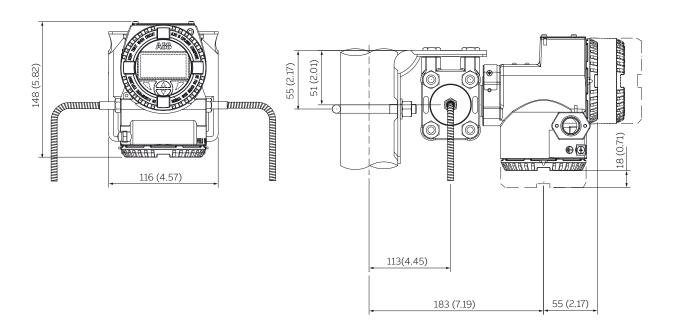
266DRH with DIN housing and remote seal(s) on bracket for vertical or horizontal 60 mm. (2 in.) pipe
